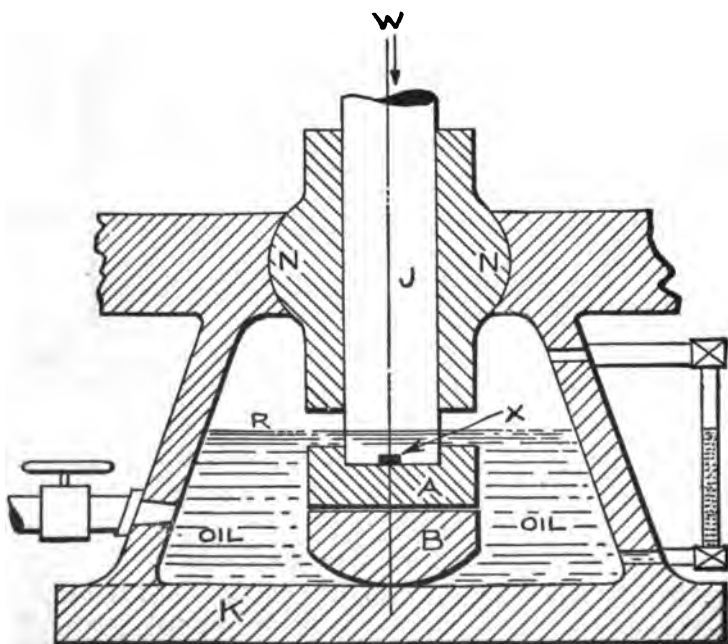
SEC. 7a.—Step bearing with sliding contact.
